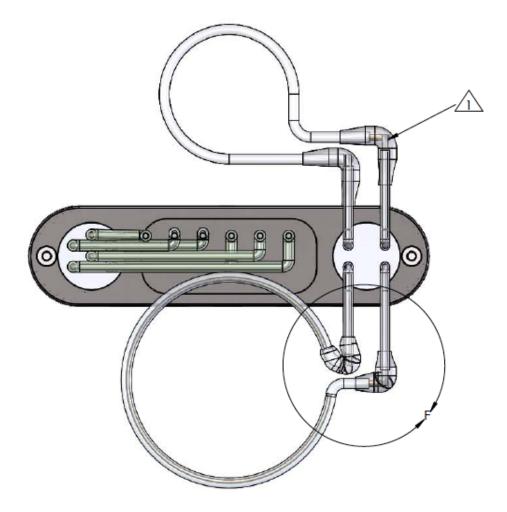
top view of IPG feedthrough assembly; top loop is gold wire RF telemetry antenna; bottom loop is charging coil used to receive inductive charging power.
